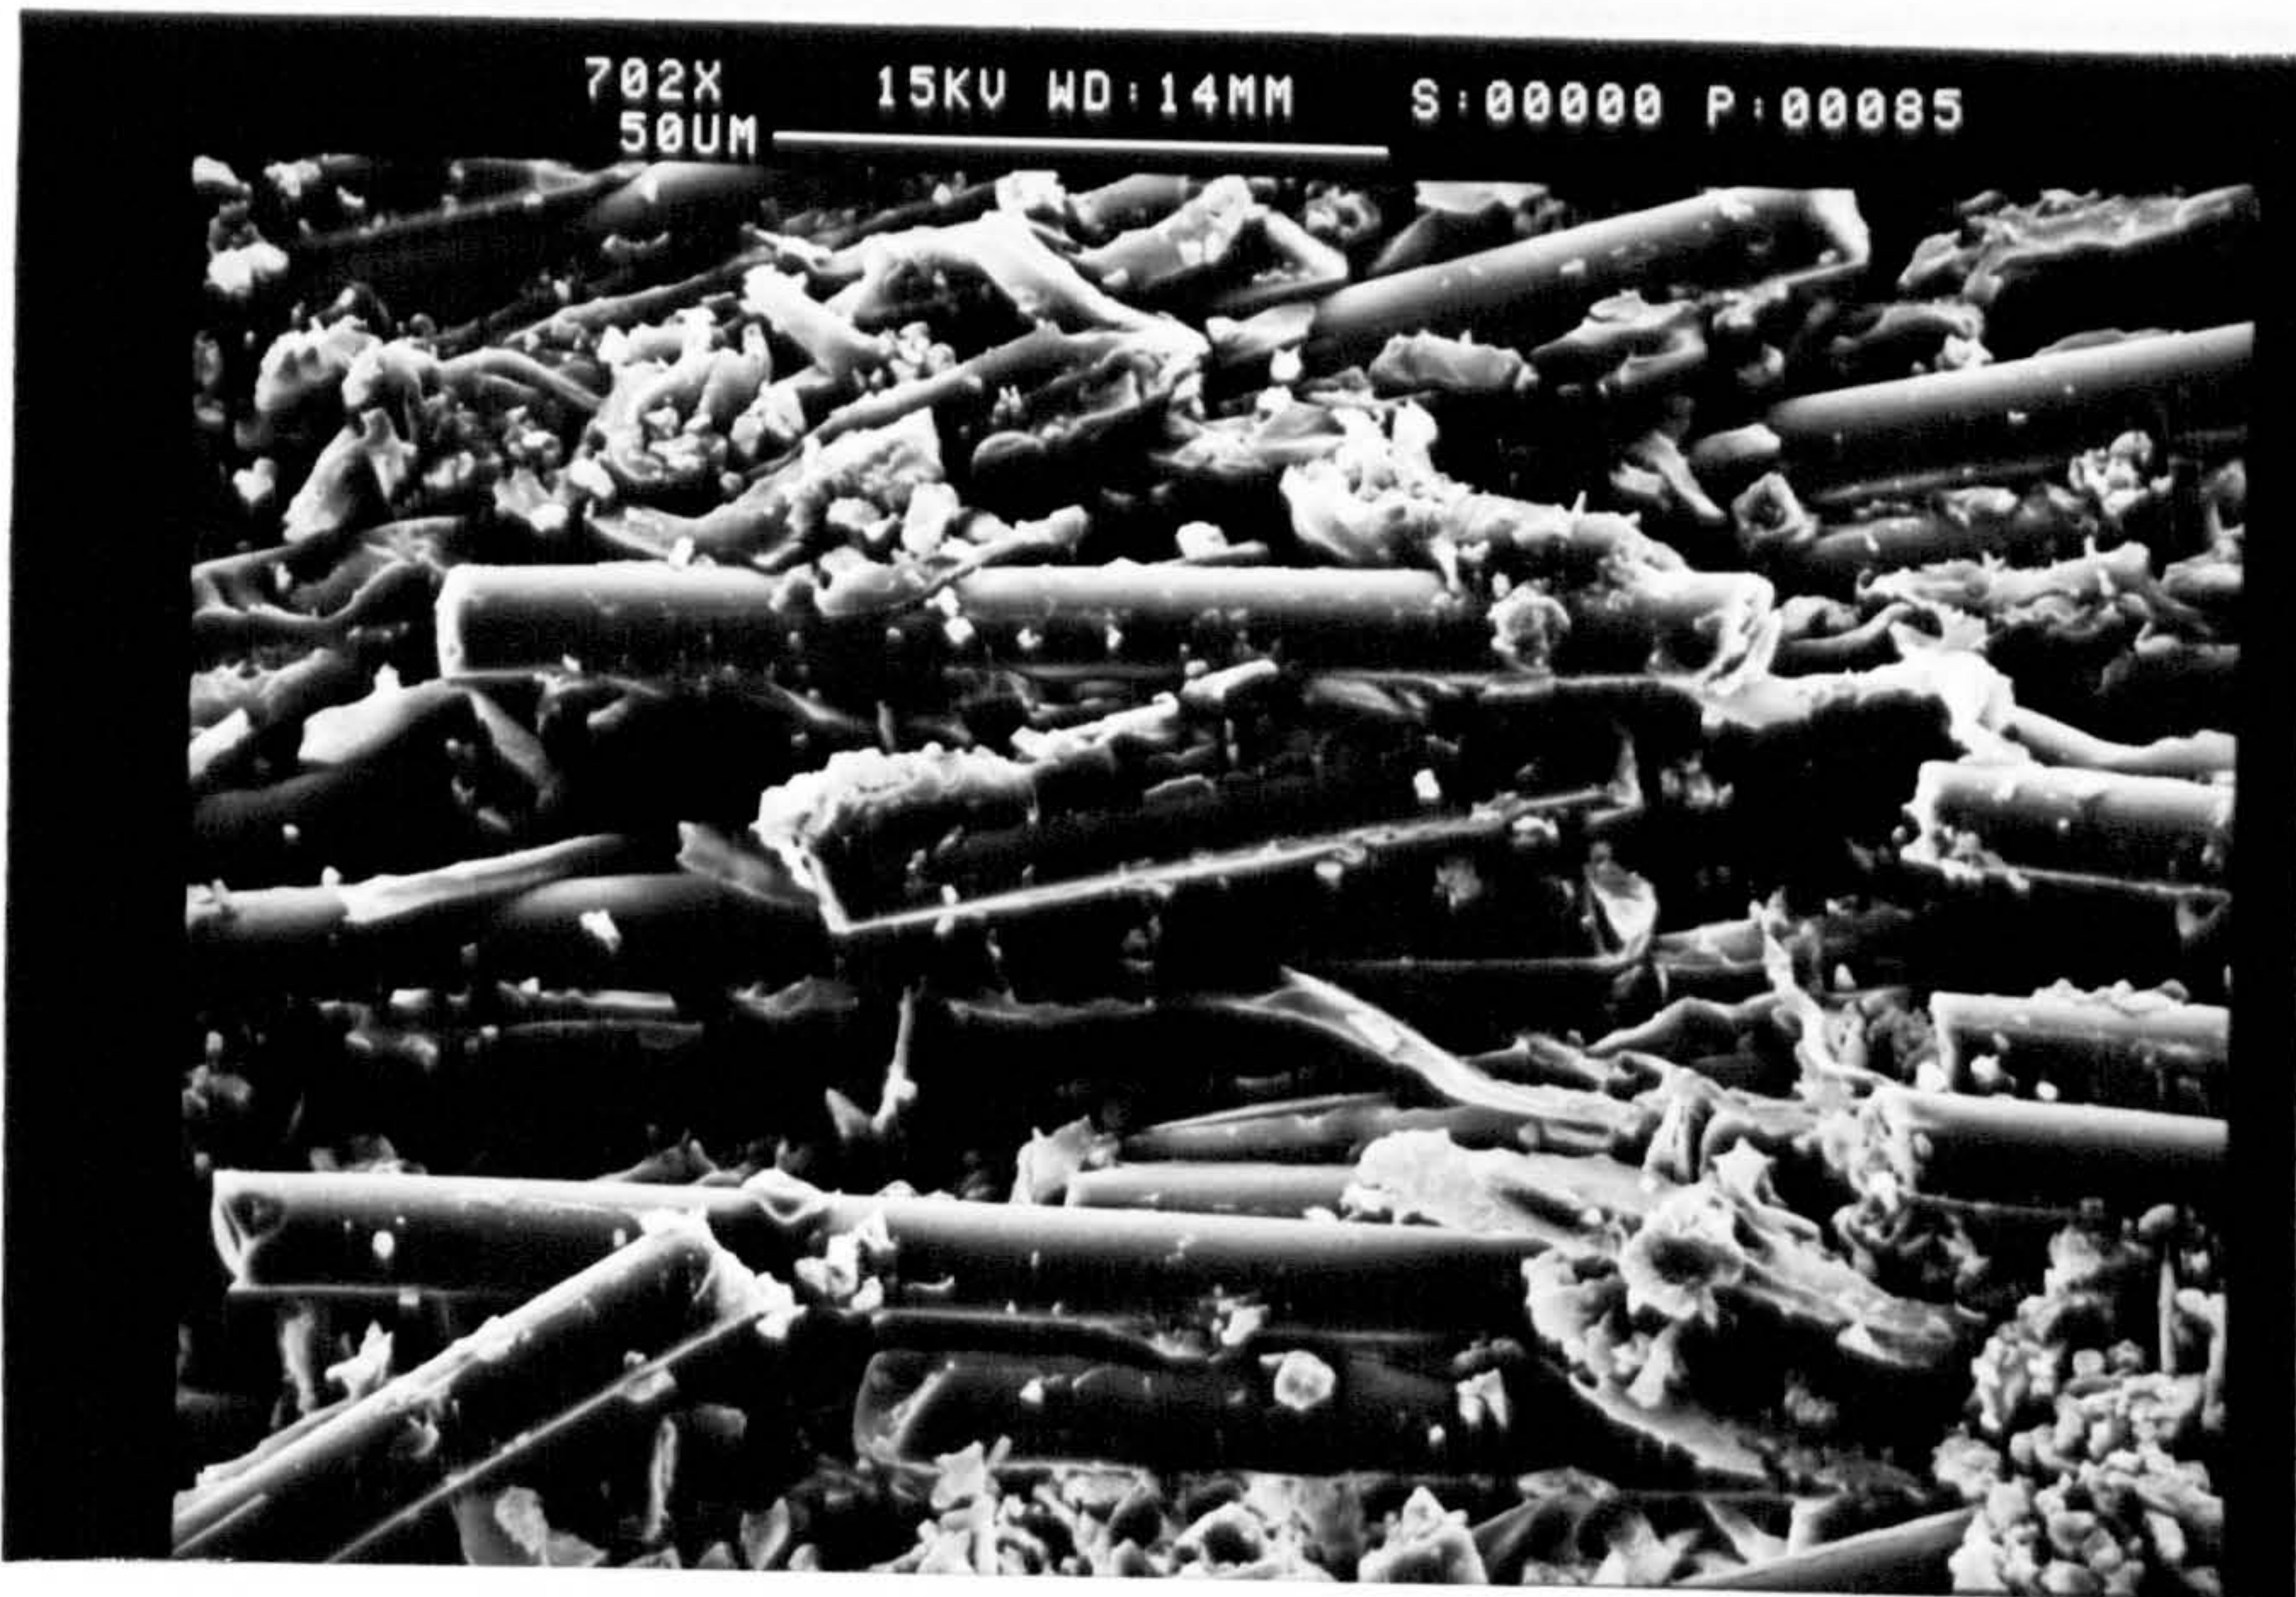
Machined GFRP surface produced at a high feed rate (0.20 mm/rev) showing fractured fibres and removed cracked resins
